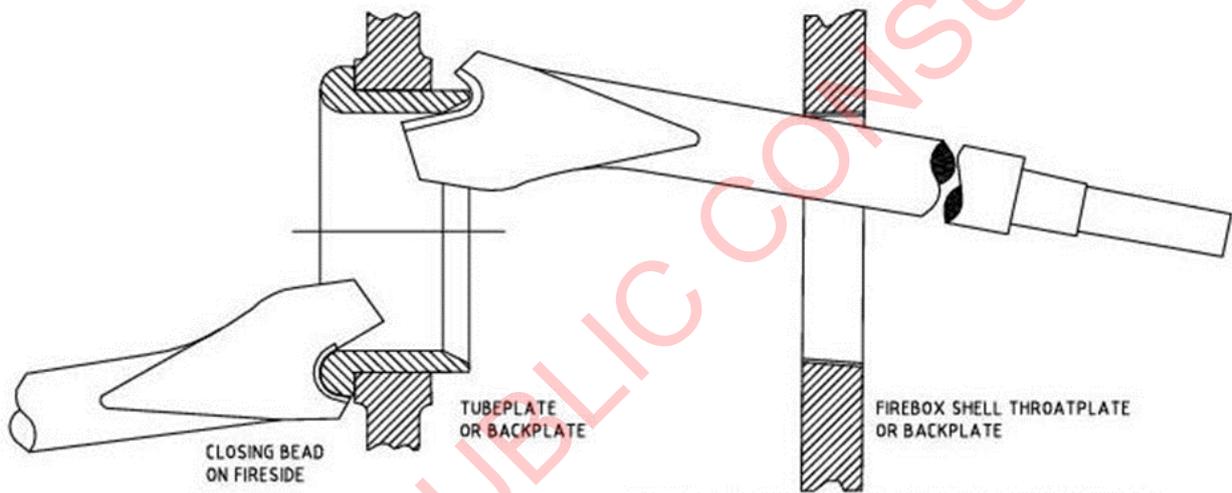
Method of beading arch tube ferrule (or bush) to firebox plates
